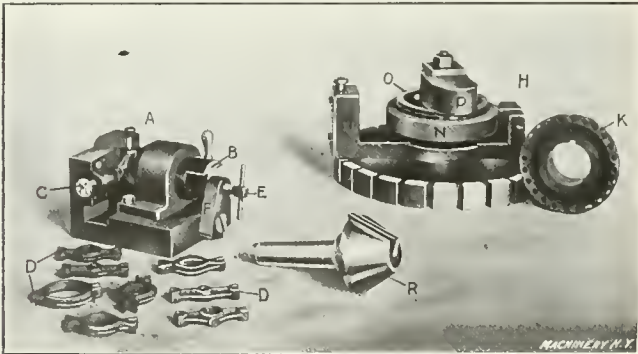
Two Examples of Drill Jigs and a Combination Centering Tool and Cone Center
